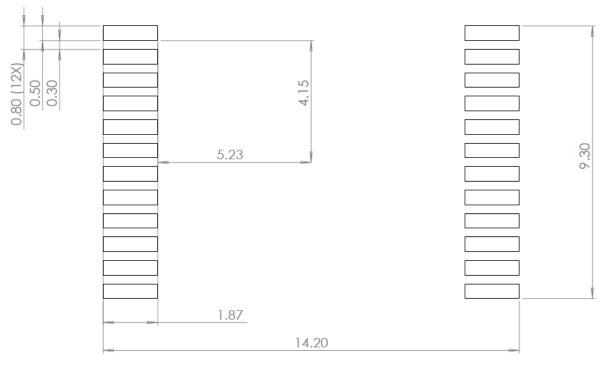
Recommended PCB pad layout for SCH16T. All dimensions are in millimeters.
